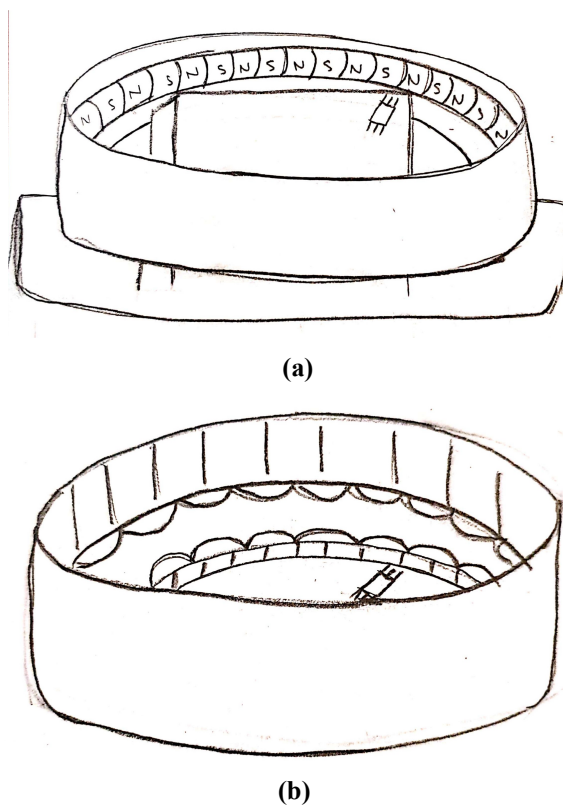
a) Sealed sensor in the knob, reading the rotating multi-pole strip magnet. b) Sensor reading a rotating Align PM.
